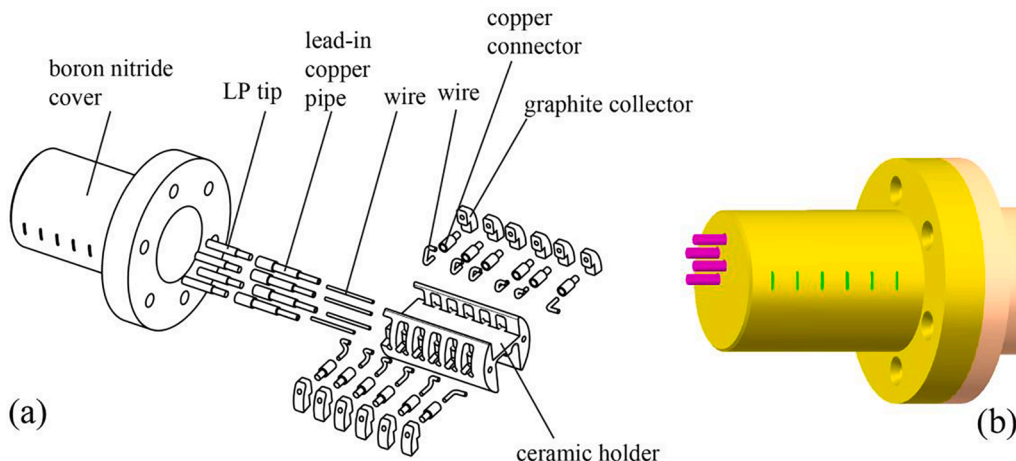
Sketch of DEP. (a) Exploded drawing; (b) side view.
